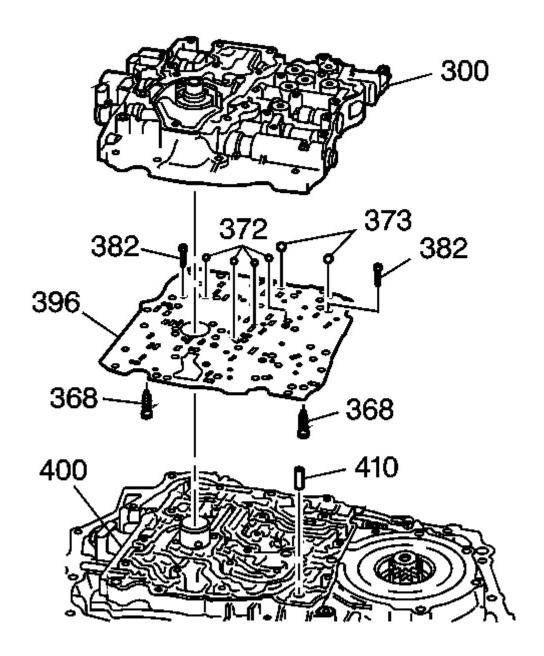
Identifying Control Valve Body Assembly Components Courtesy of GENERAL MOTORS CORP.
